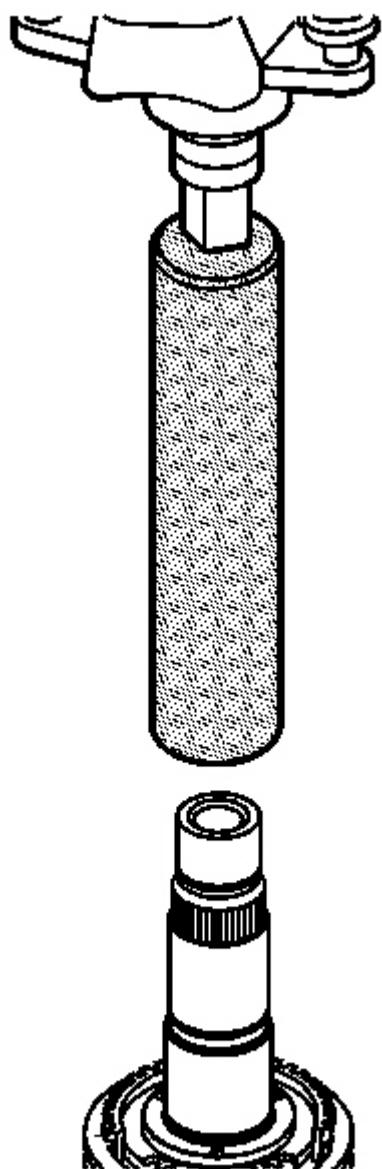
Installing 3rd/4th Synchronizer Hub Assembly
